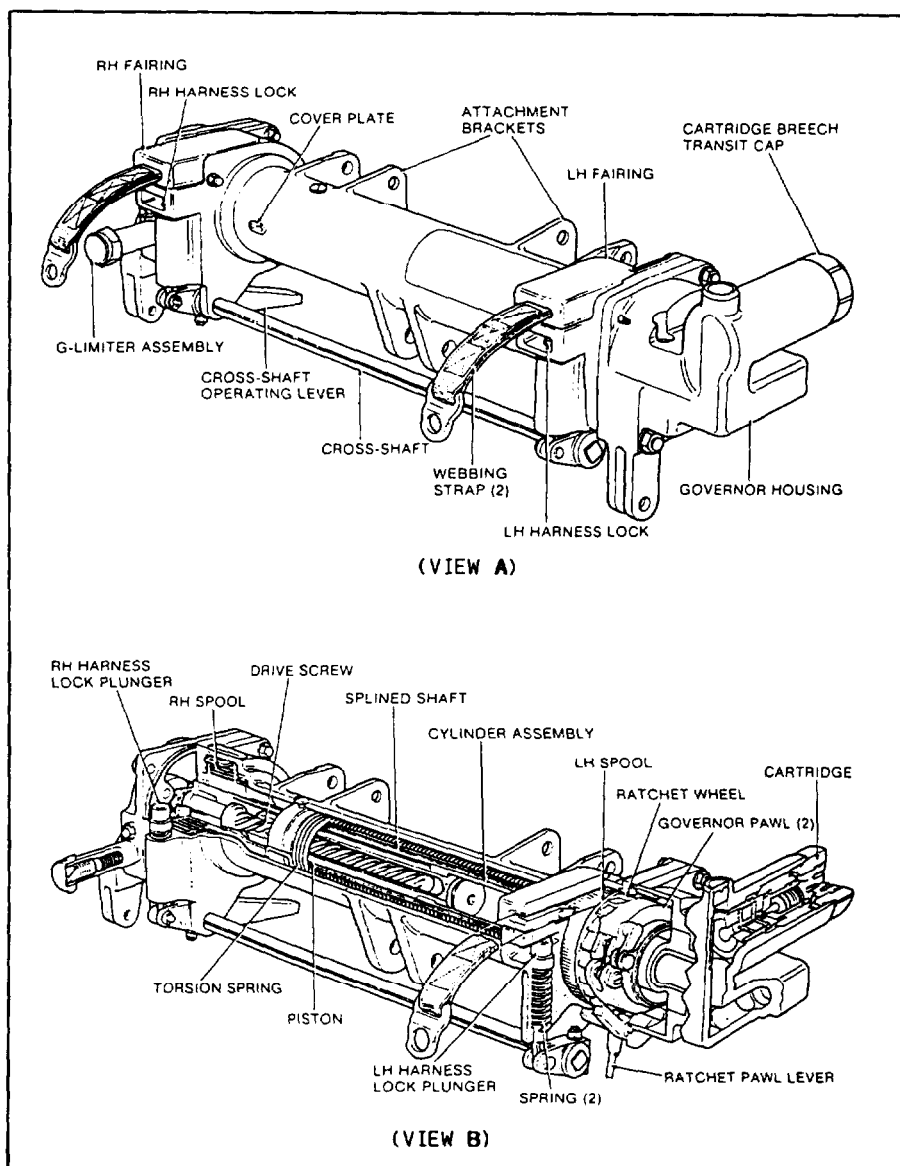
View A, shoulder harness reel; view B, shoulder harness reel, sectioned view.
